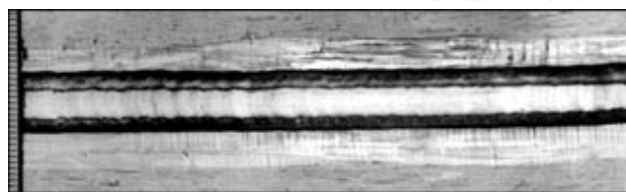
Appearance of a weld in HAW of alloy 1201 10 mm thick ($I_w = 300$ A, $v_w = 12$ m/h)
